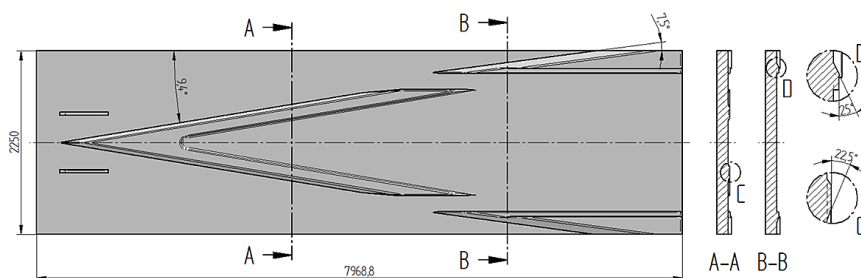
Wedge tool for forming a railcar axle from a cylindrical bille
